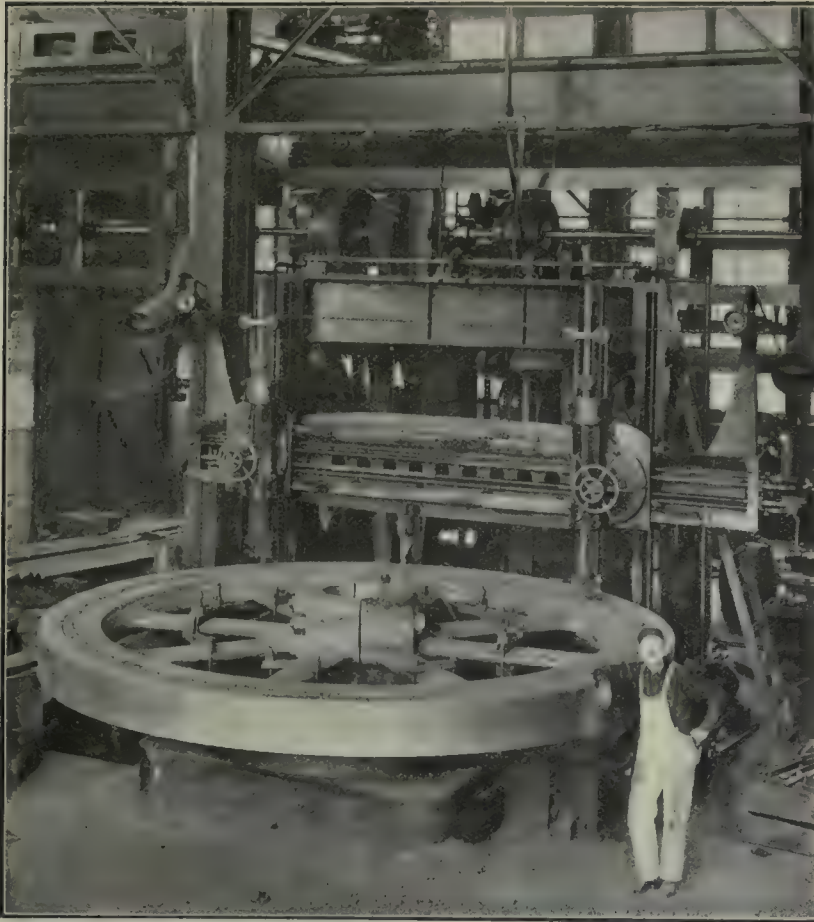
Turning One of Large Flywheels for 15,000,000 Gallon Engine and Pump.
